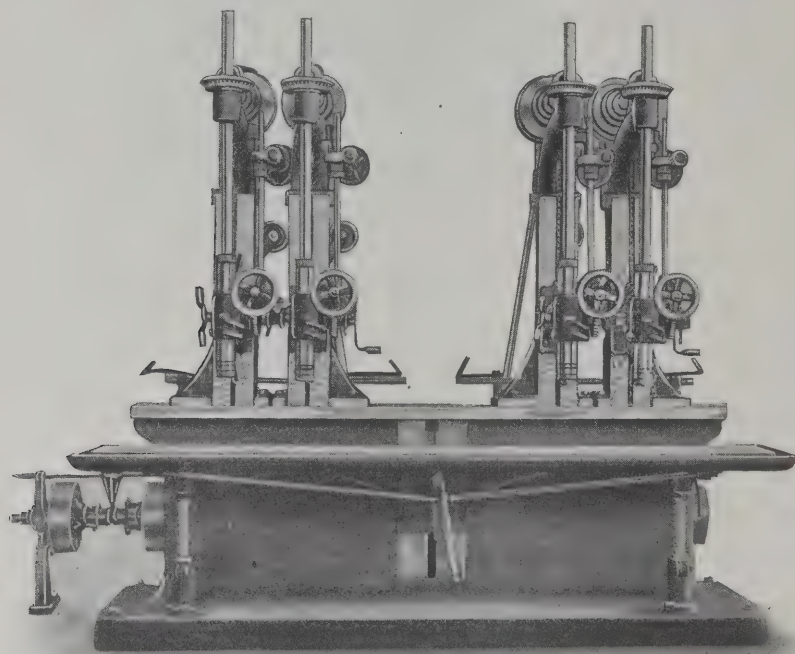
A Four-spindle Gang Drill with Adjustable Columns
